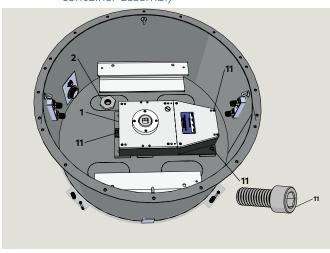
Fasteners; Motion Assist 360 drive mounting plate to U-channels
